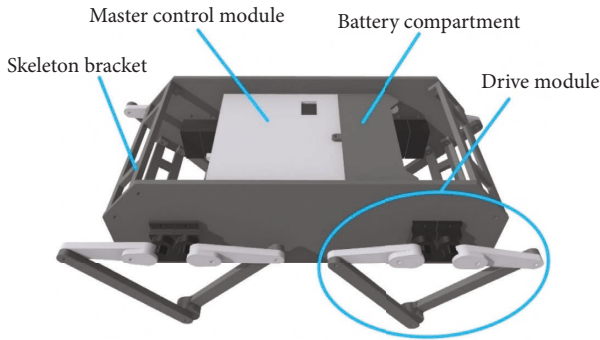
Small quadruped robot with a parallel leg mechanism.
